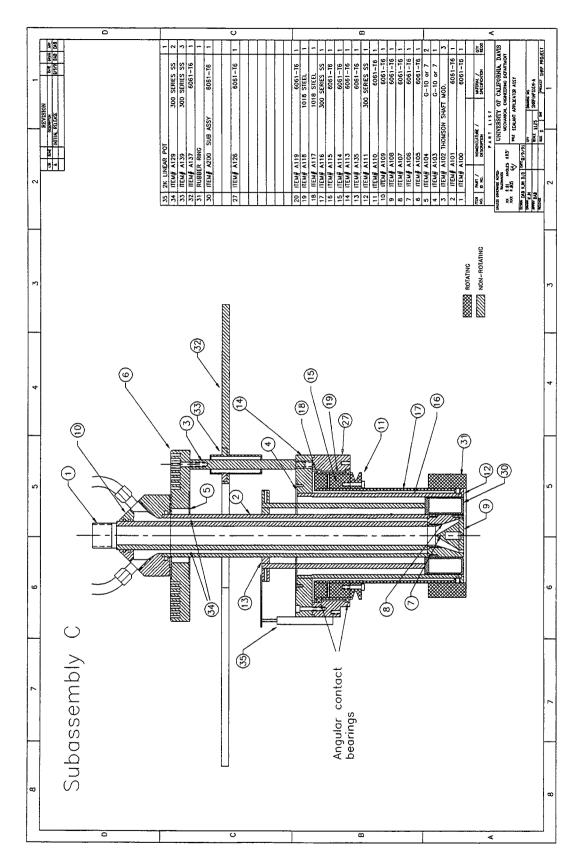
Sealant Supply Tube With Rotating Components
